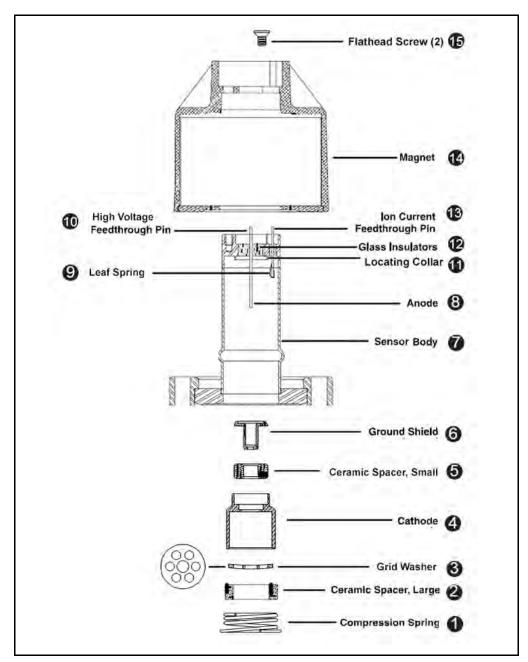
423 I-Mag Sensor Assembly Illustration
